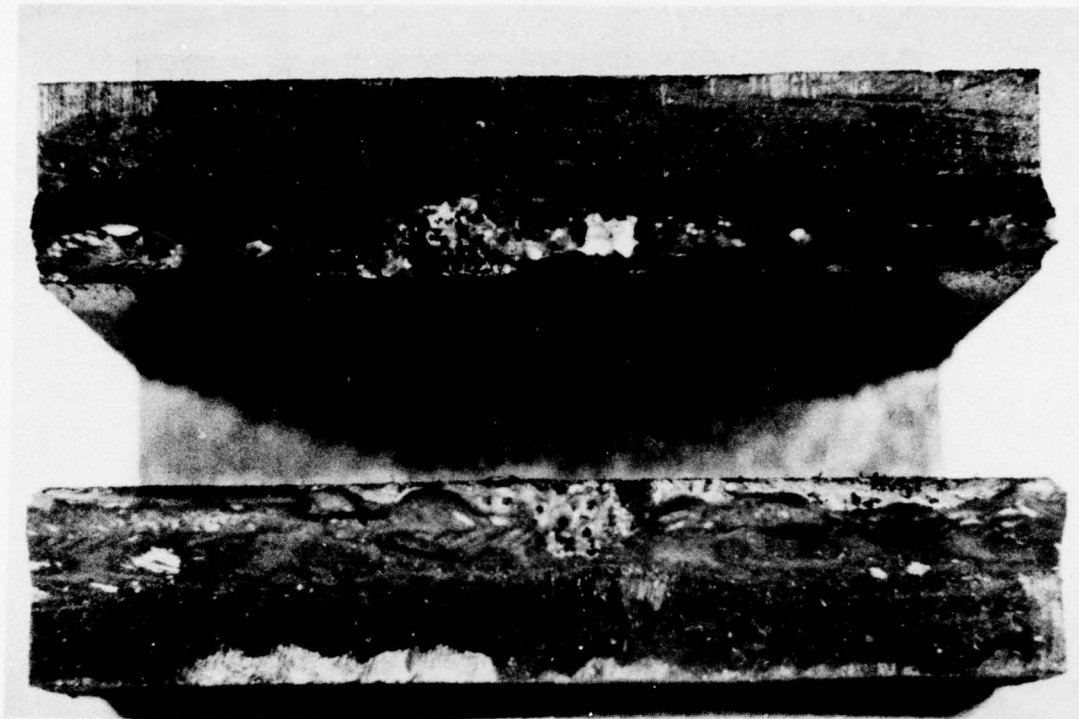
Fracture surfaces of fillet weld specimen containing clustered porosity.
